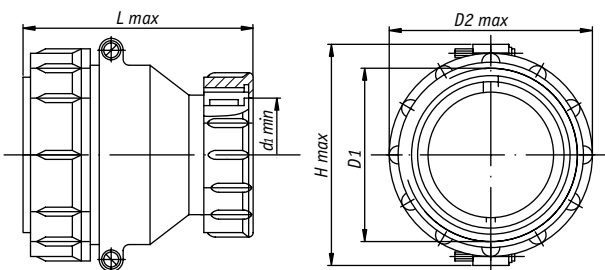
Cable connector plugs and sockets (KPEA) with straight pipe and nut for shielded cable
